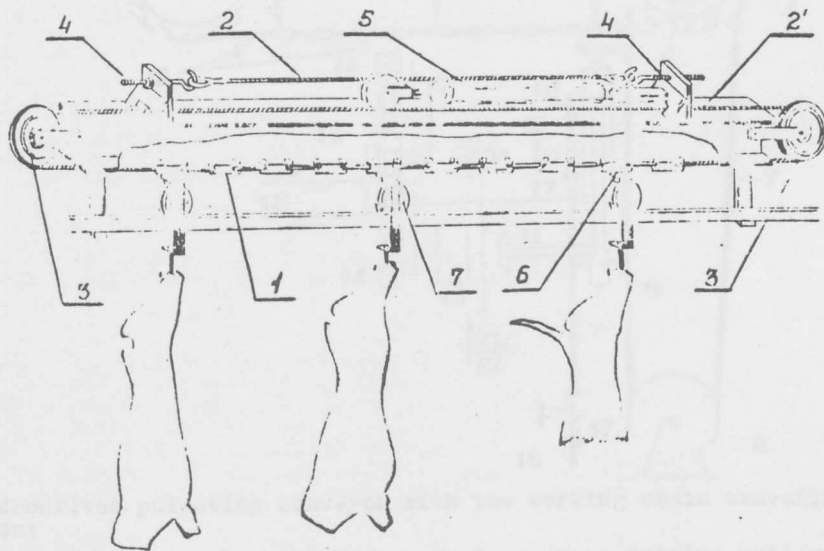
A hydrodriven pulsating conveyor with a reciprocating working chain:
